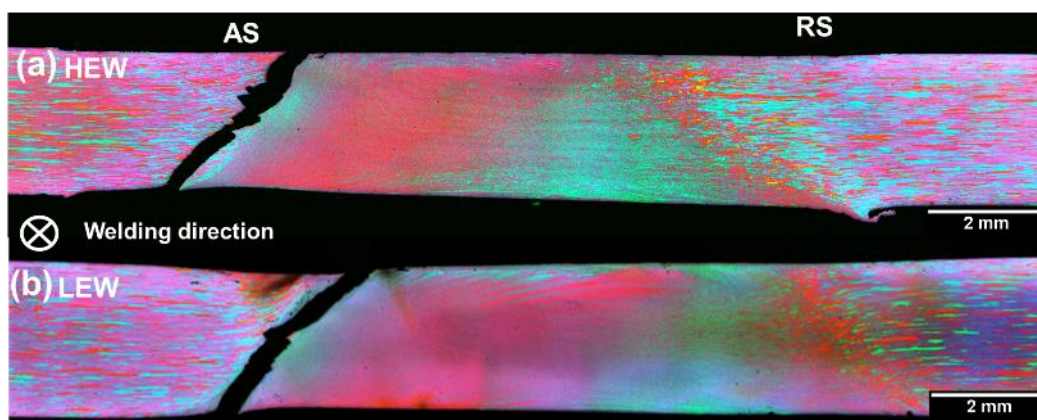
Fracture location and shape observed by optical microscope in welding direction of AA2060 sample welded by (a) SSuBT-FSW HEW and (b) SSuBT-FSW LEW. All AA2060 samples welded by SSuBT-FSW in LEW and HEW presented fracture mode II.
